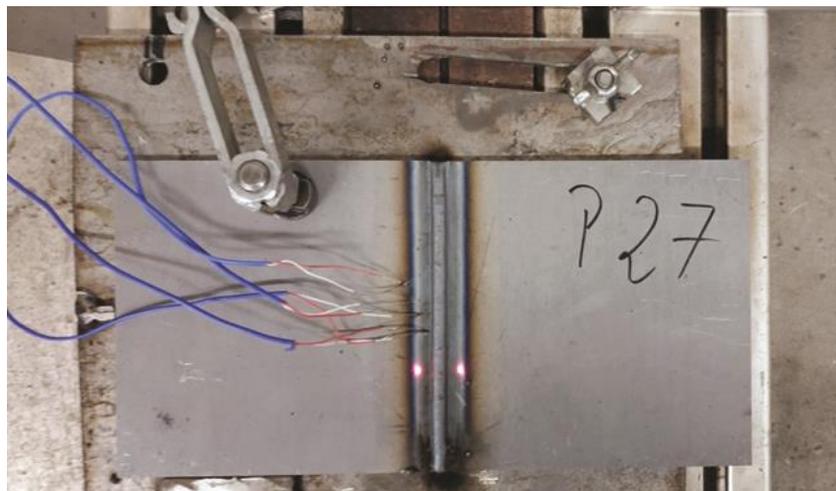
View of the thermocouples attached to the test sheet after the MAG butt welding test
